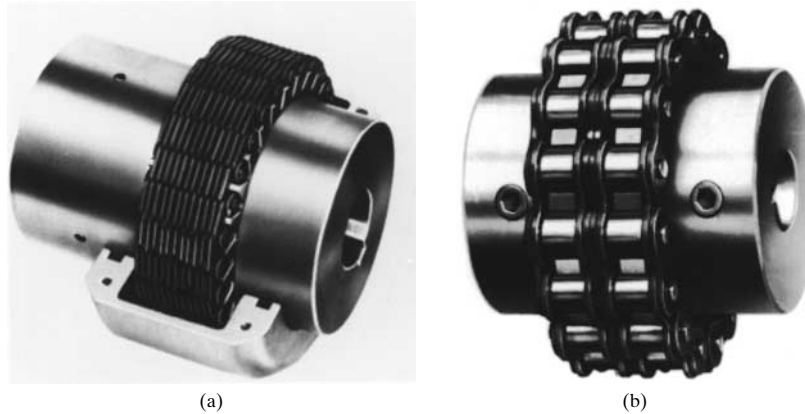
(a) Silent-chain coupling; (b) roller-chain coupling. (Morse Industrial Products, Borg-Warner Corp.)
